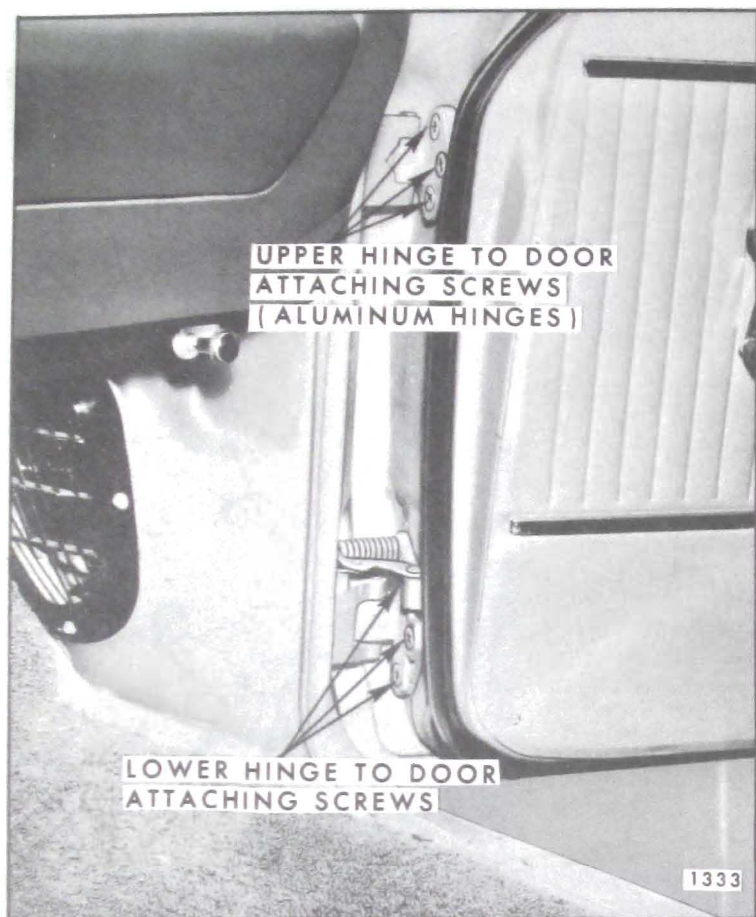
Front Door Hinge Attachment - "A" Styles
